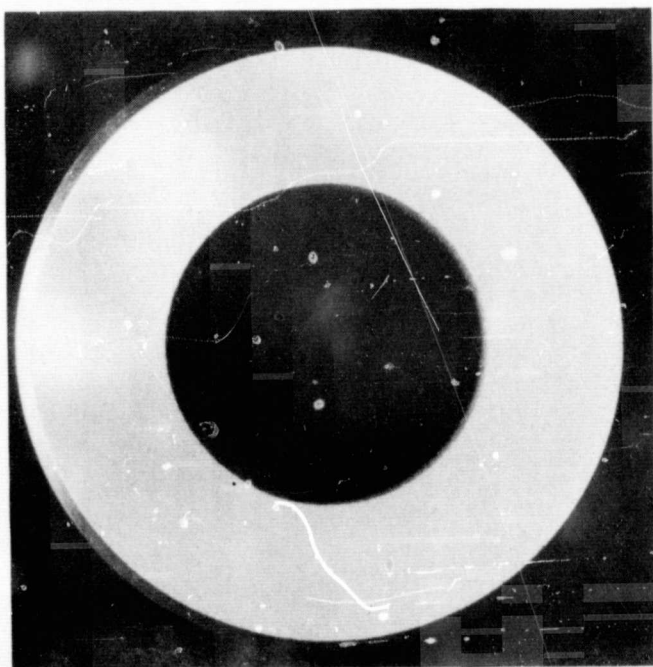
Condition of Hardface Seal Surface of Test Unit 4 Before Test (XP-83424)
